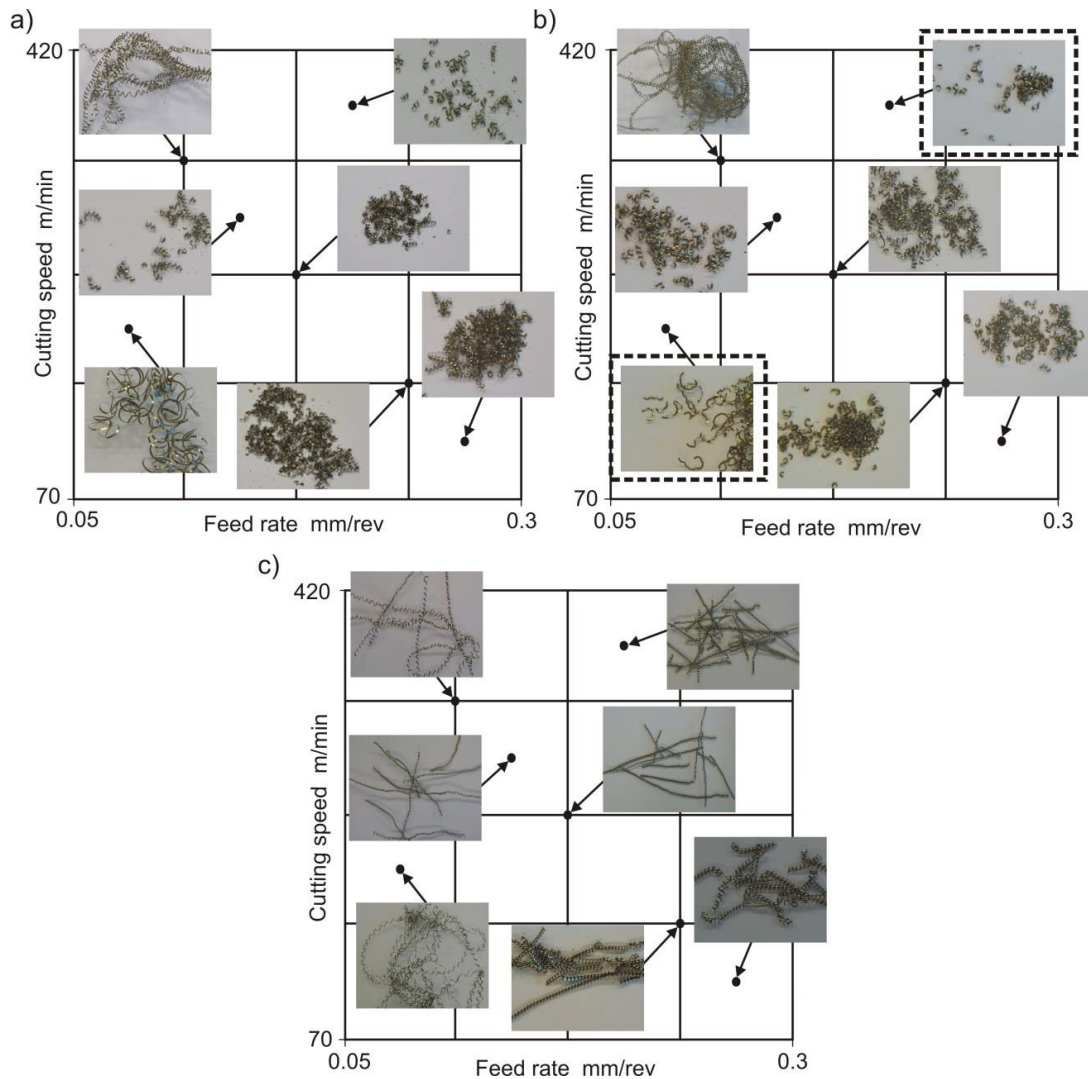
Chip shapes after the process of turning 316L austenitic steel for: (a) dry machining; (b) MQCL; (c) MQCL +EP/AW.
